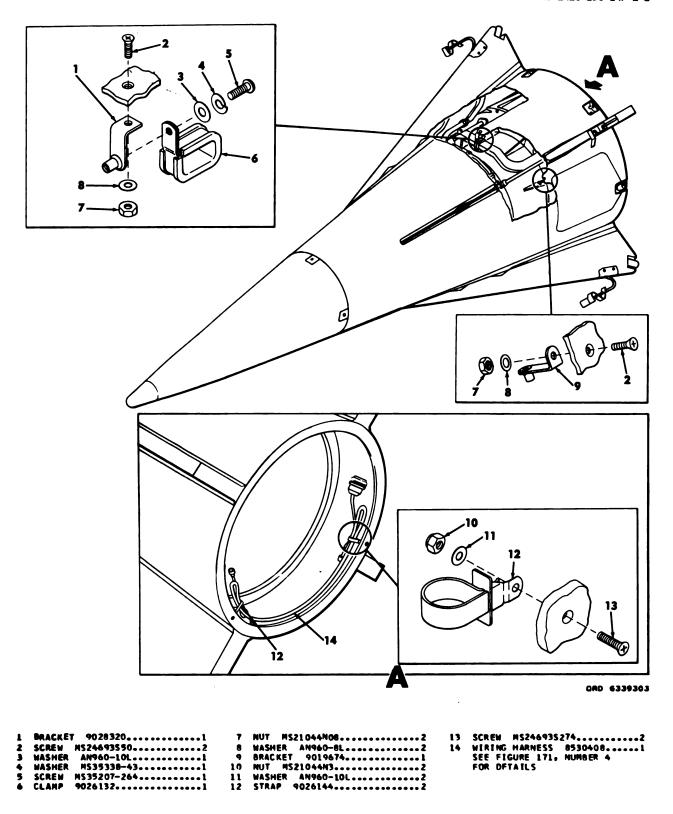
EQUIPMENT INSTALLATION, FORWARD BODY ASSEMBLY /9020575 AND 9979613/
